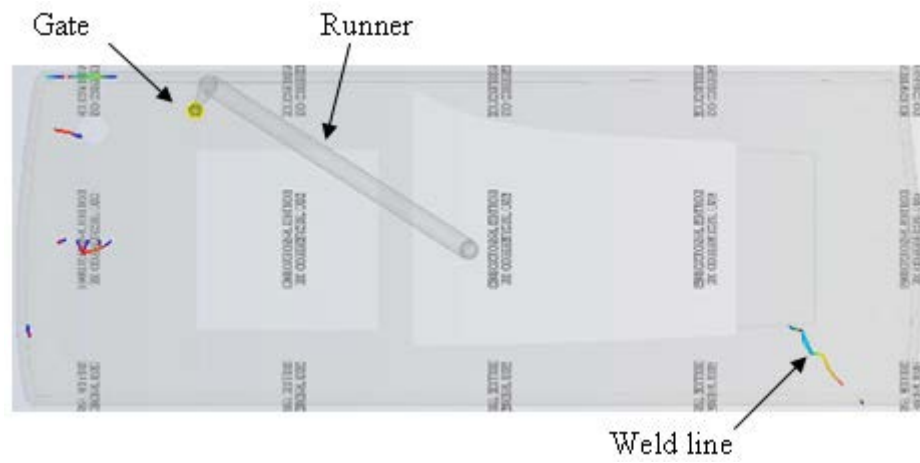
Weld lines produced by runner diameter of 3.542mm
